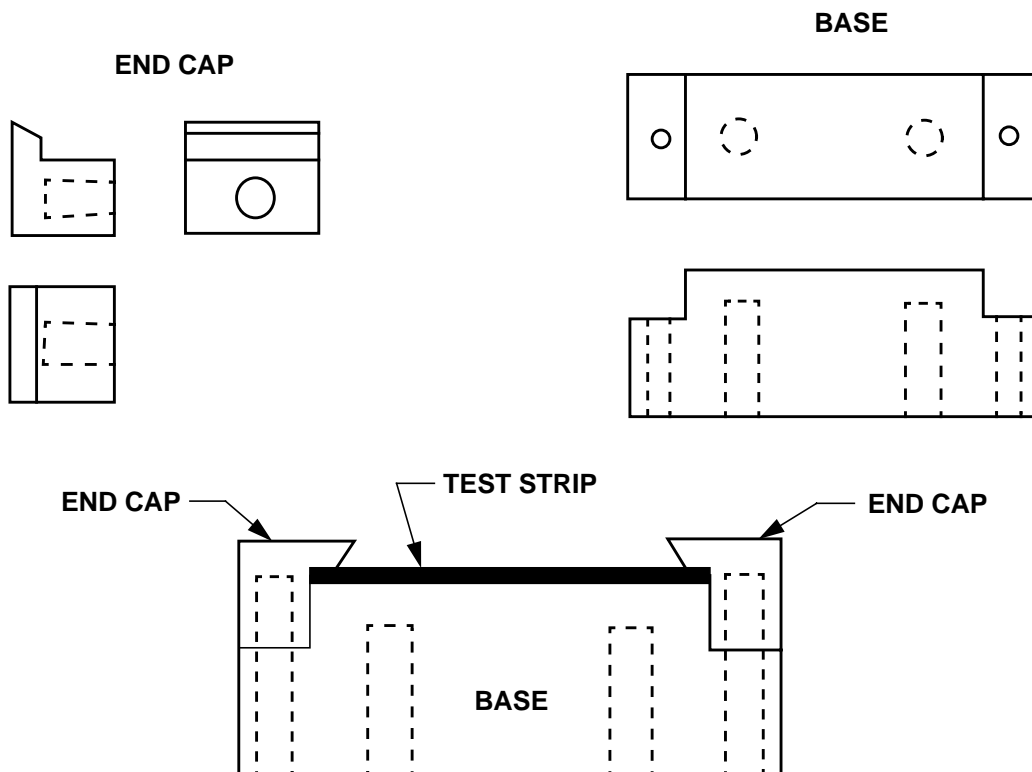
ALMEN N-TYPE RESIDUAL STRESS TEST SPECIMEN AND FIXTURE
